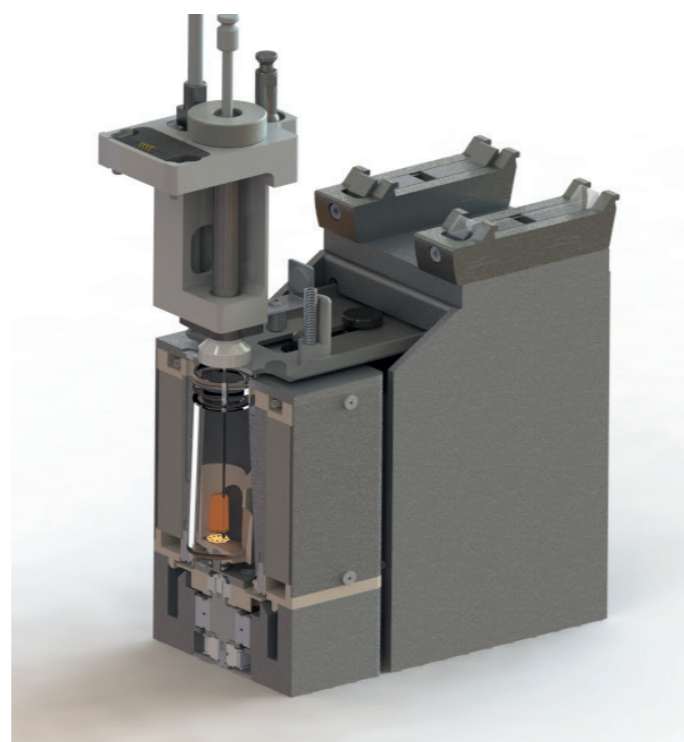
Cutaway view of the Heatex Stirrer Module with SPME tool.
